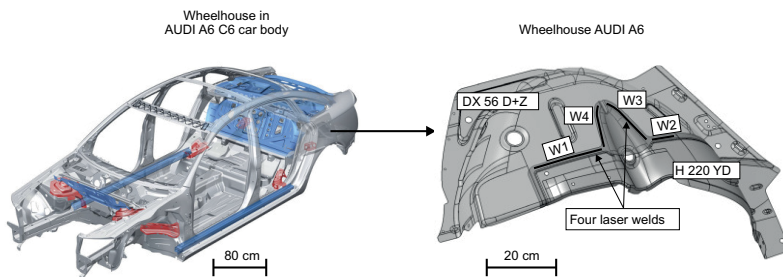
Position of the wheelhouse in the AUDI A6 (type C6) car body - welding sequence from the weld W1 to the weld W4
